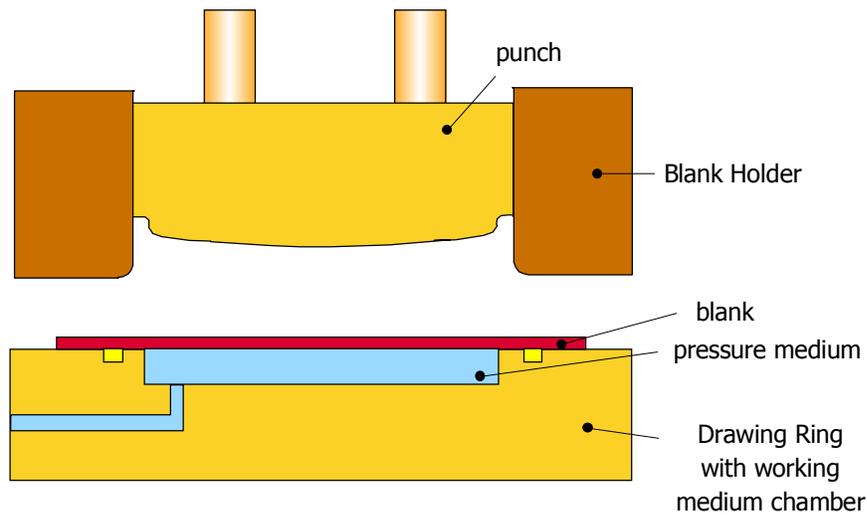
First stage of the AHM process- Loading of the steel blank
